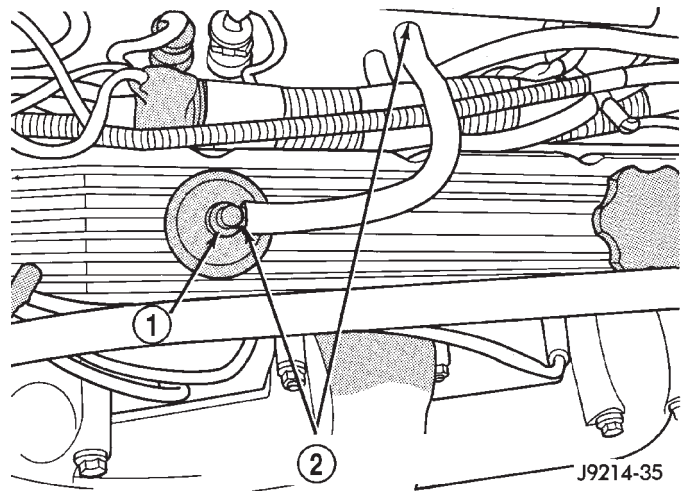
PCV Valve Hose Connections—3.9/5.2/5.9L Engines—Typical
